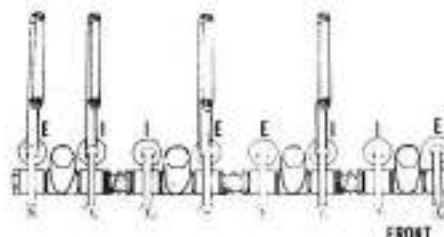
With No. 1 piston of four-cylinder engine on TDC exhaust stroke, adjust intake valve on No. 2 cylinder, exhaust valve on No. 3 cylinder and the intake and exhaust valves on No. 4 cylinder. Refer also to Fig. 40.
